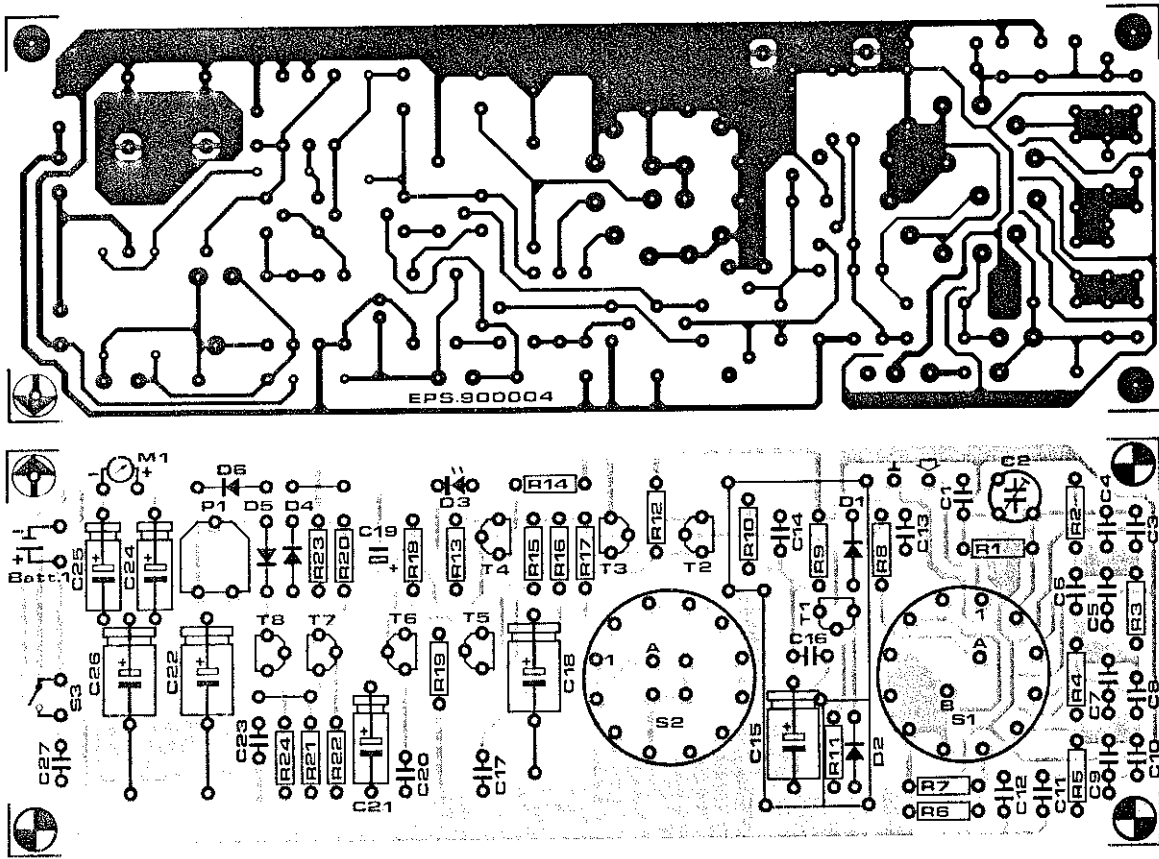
Track layout and component mounting plan of the single-sided printed-circuit board for the millivoltmeter.
